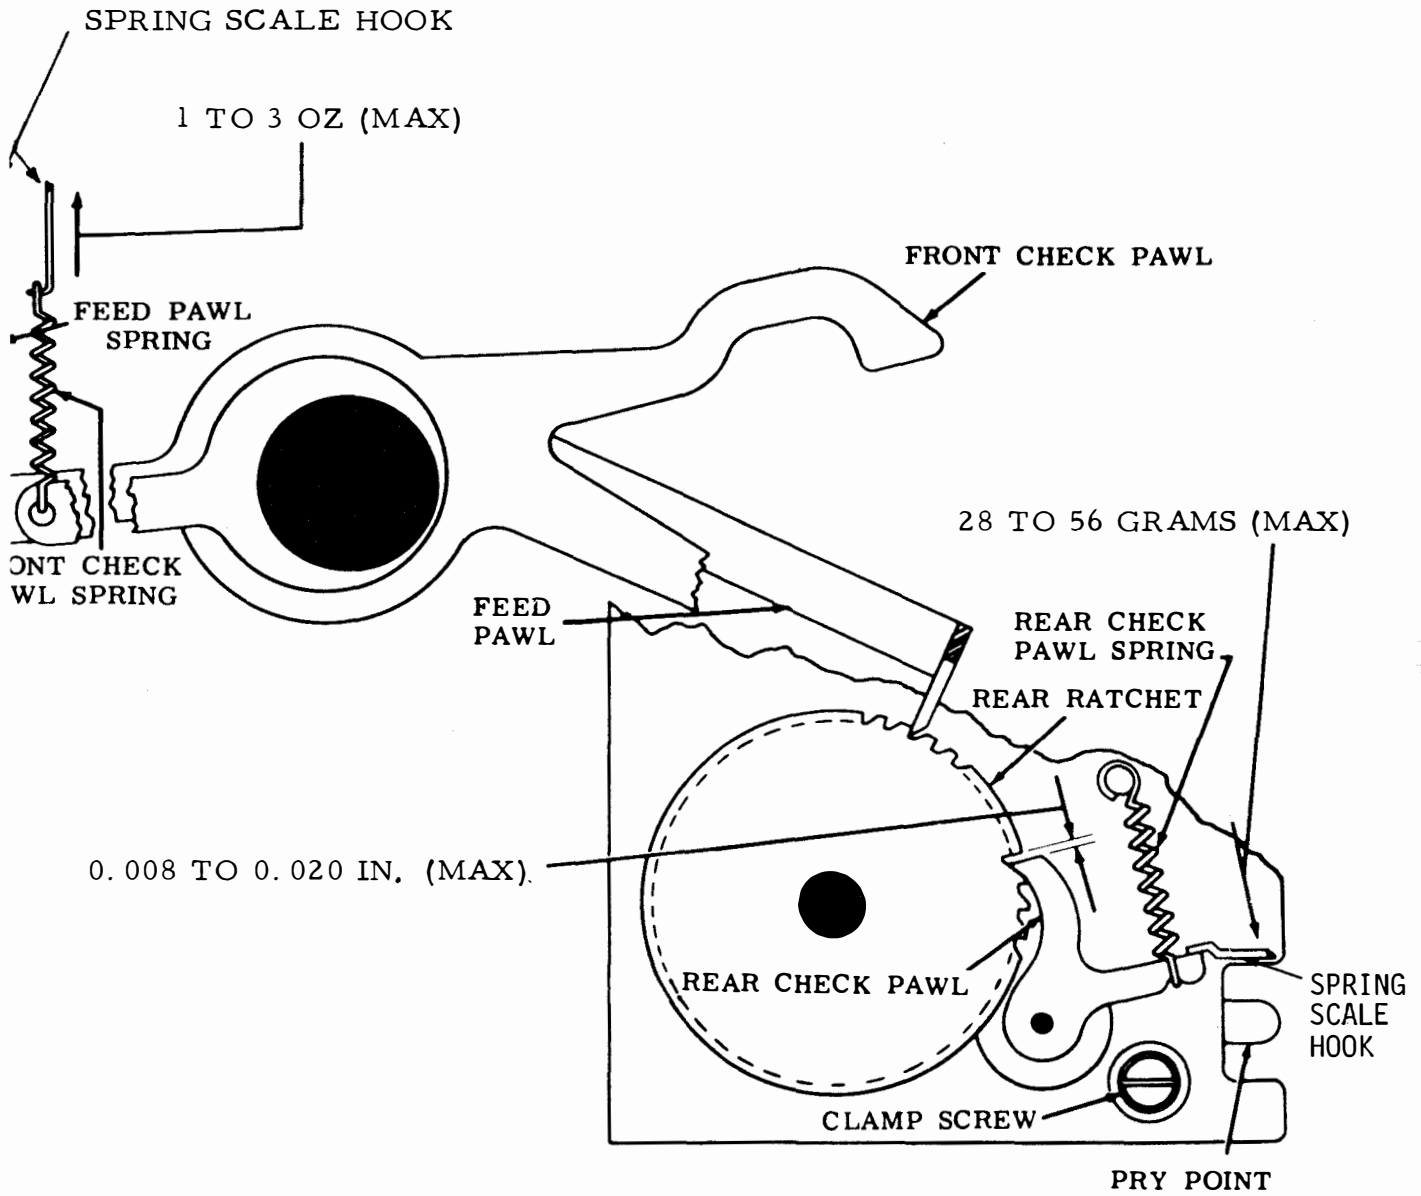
Rear Check Pawl, Rear Check Pawl Spring, and Feed Pawl and Front Check Pawl Springs, Reperforator, Front View
